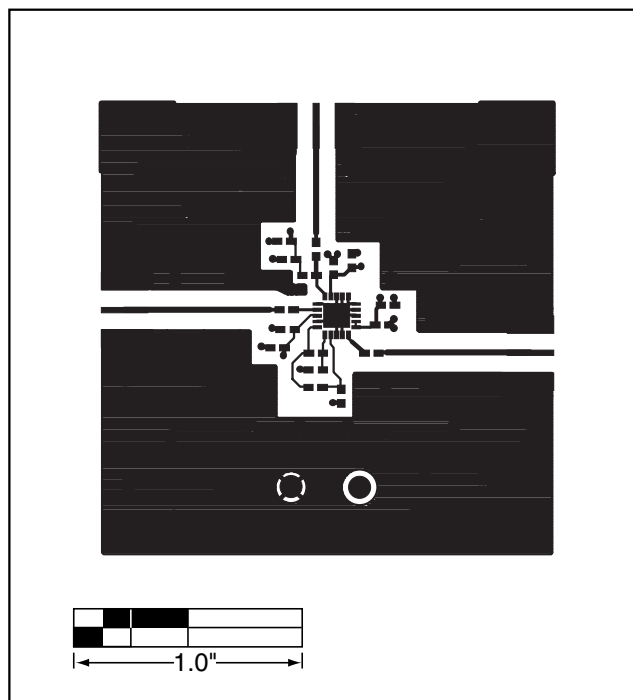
MAX9989/MAX9990 EV Kit PC Board Layout—Top Layer Metal
